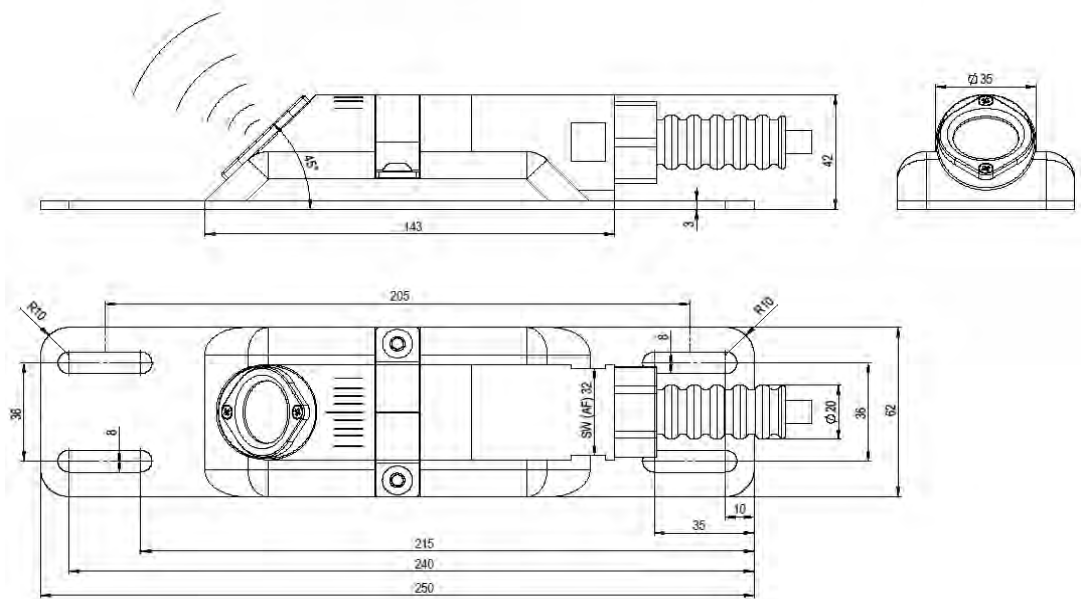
Dimensioned drawing wedge sensor Type NIS-V280KS
